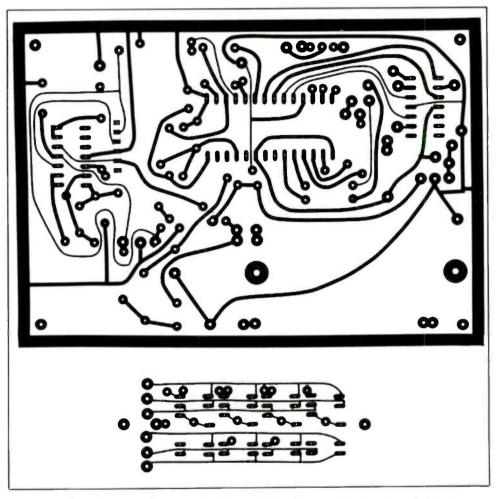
Actual-size etching-and-drilling guides for main (large) and display (small) printed-circuit boards.
